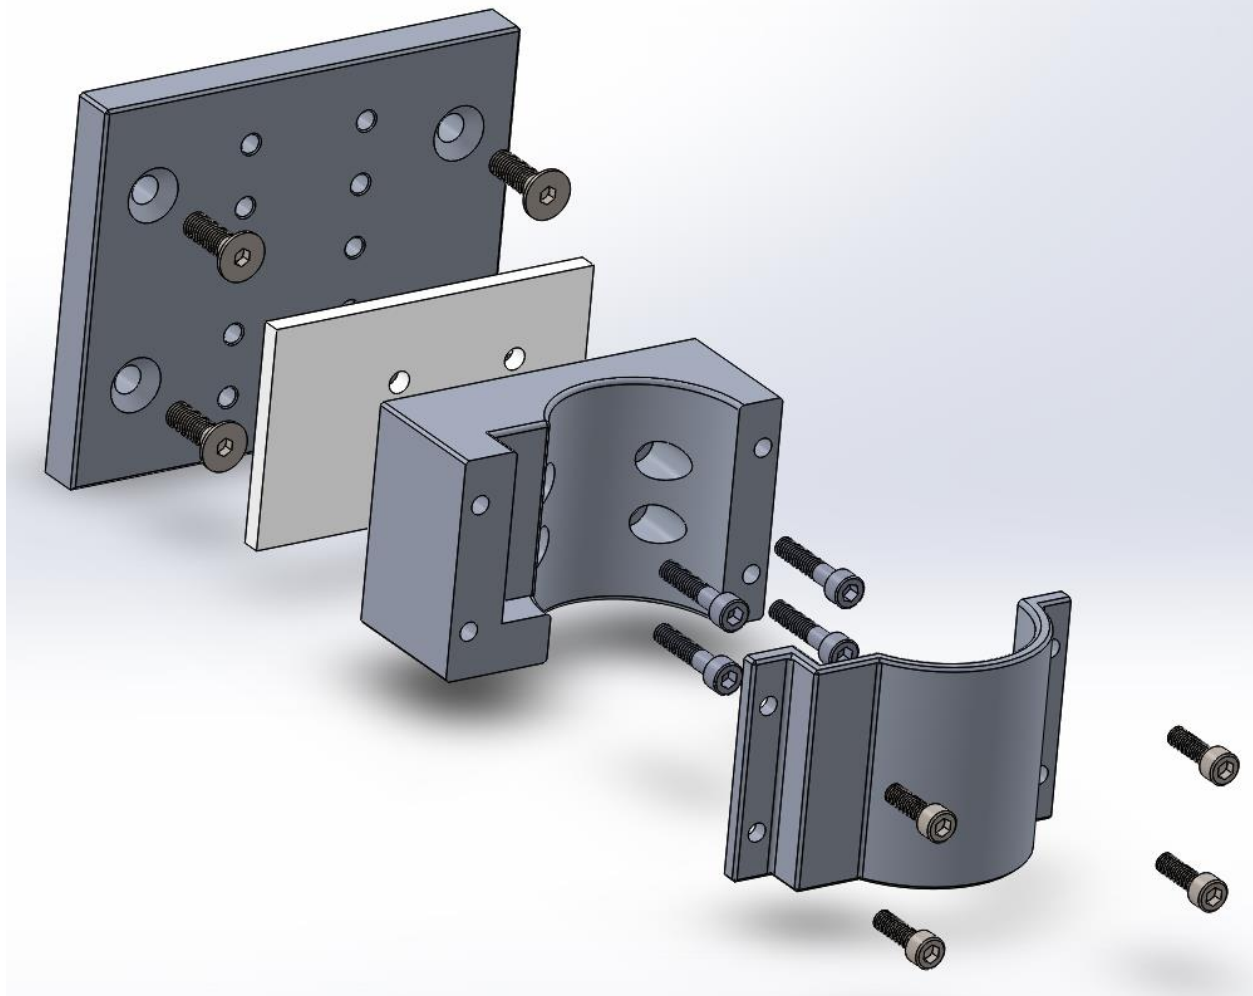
Exploded view of the assembly for the glue gun mounting bracket and plate.
